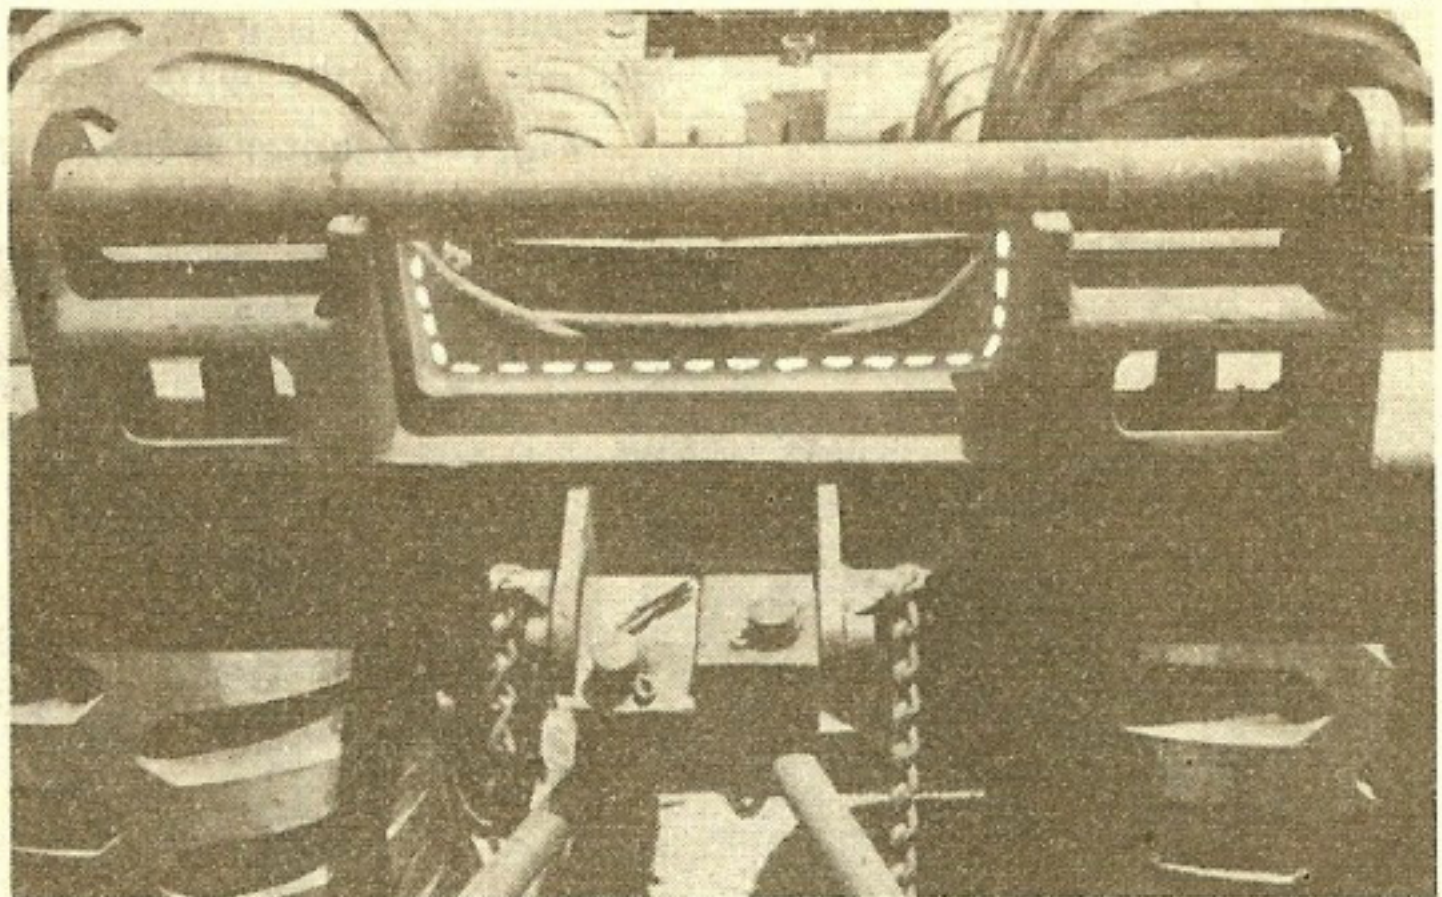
Rear-removable-roller assembly for M15 Semitrailer.
